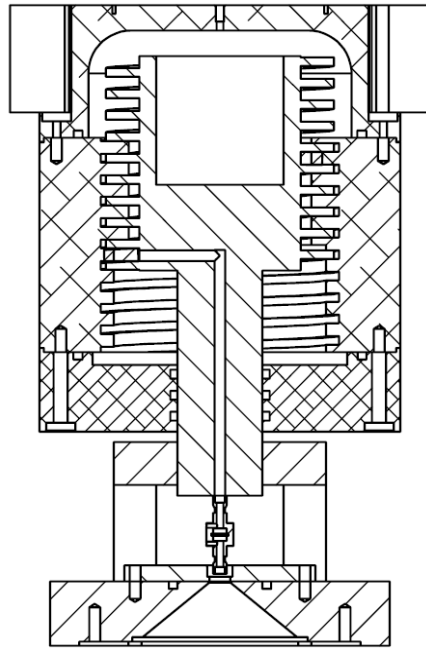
Schematic of the adjustable threaded inertance tube
